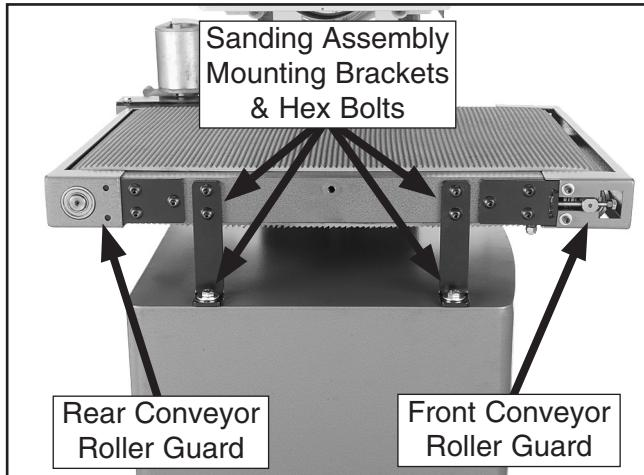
Conveyor roller guards and sanding assembly mounting brackets.
